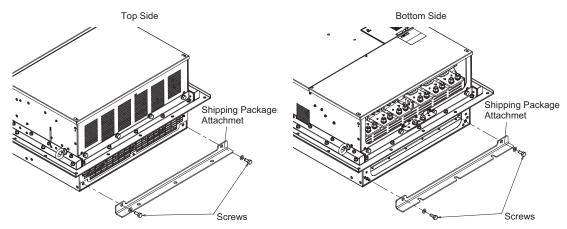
Removing the Shipping Package Attachments (example: CIMR-A□4T0675U)
